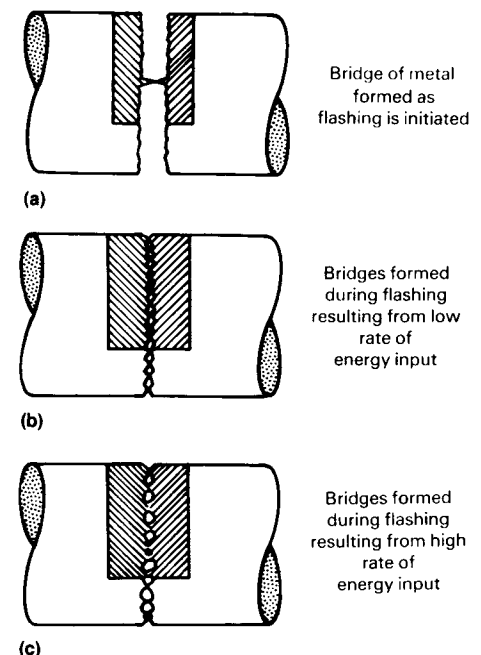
Growth of contact points produced by energy input during flash welding
